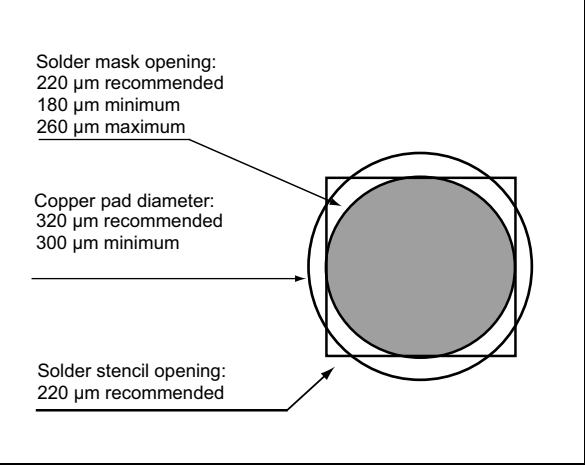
Footprint - 5 mils stencil - non solder mask defined
